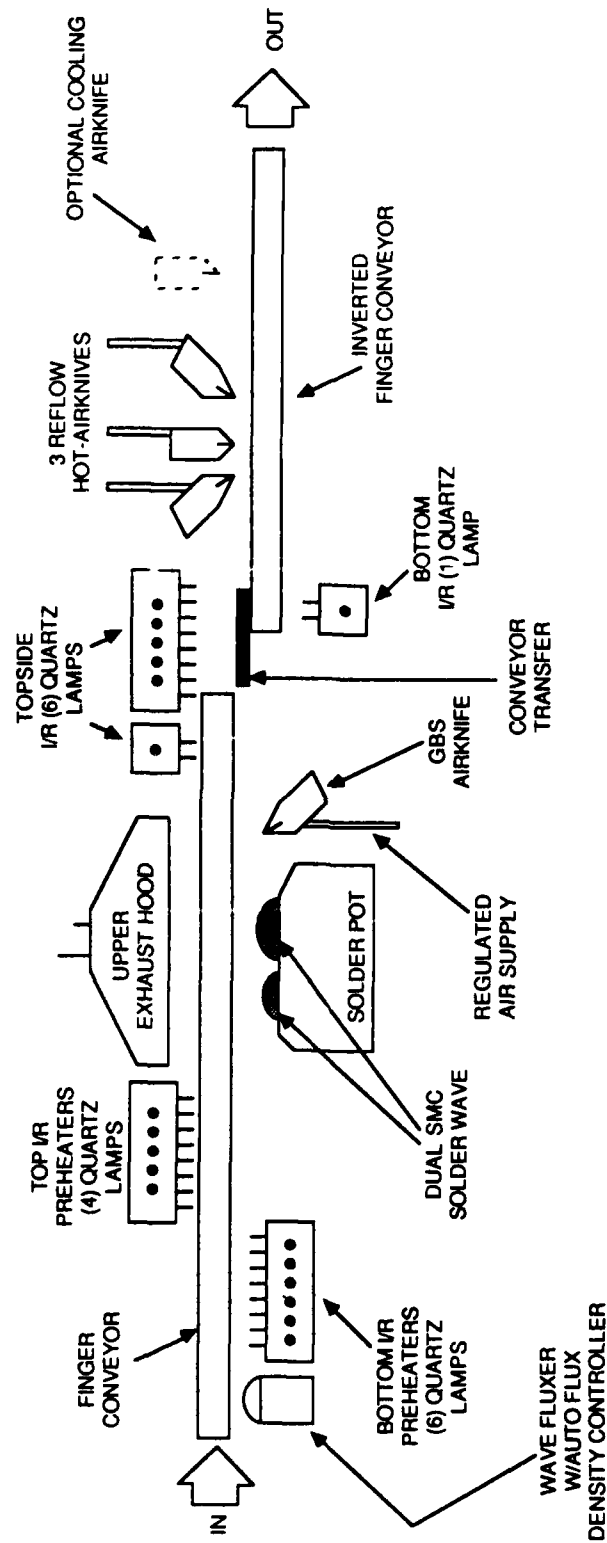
Diagram of Single-Pass Soldering System (SPS).
